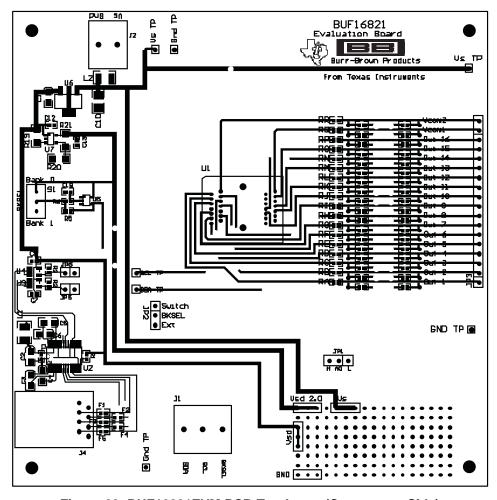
BUF16821EVM PCB Top Layer (Component Side)
